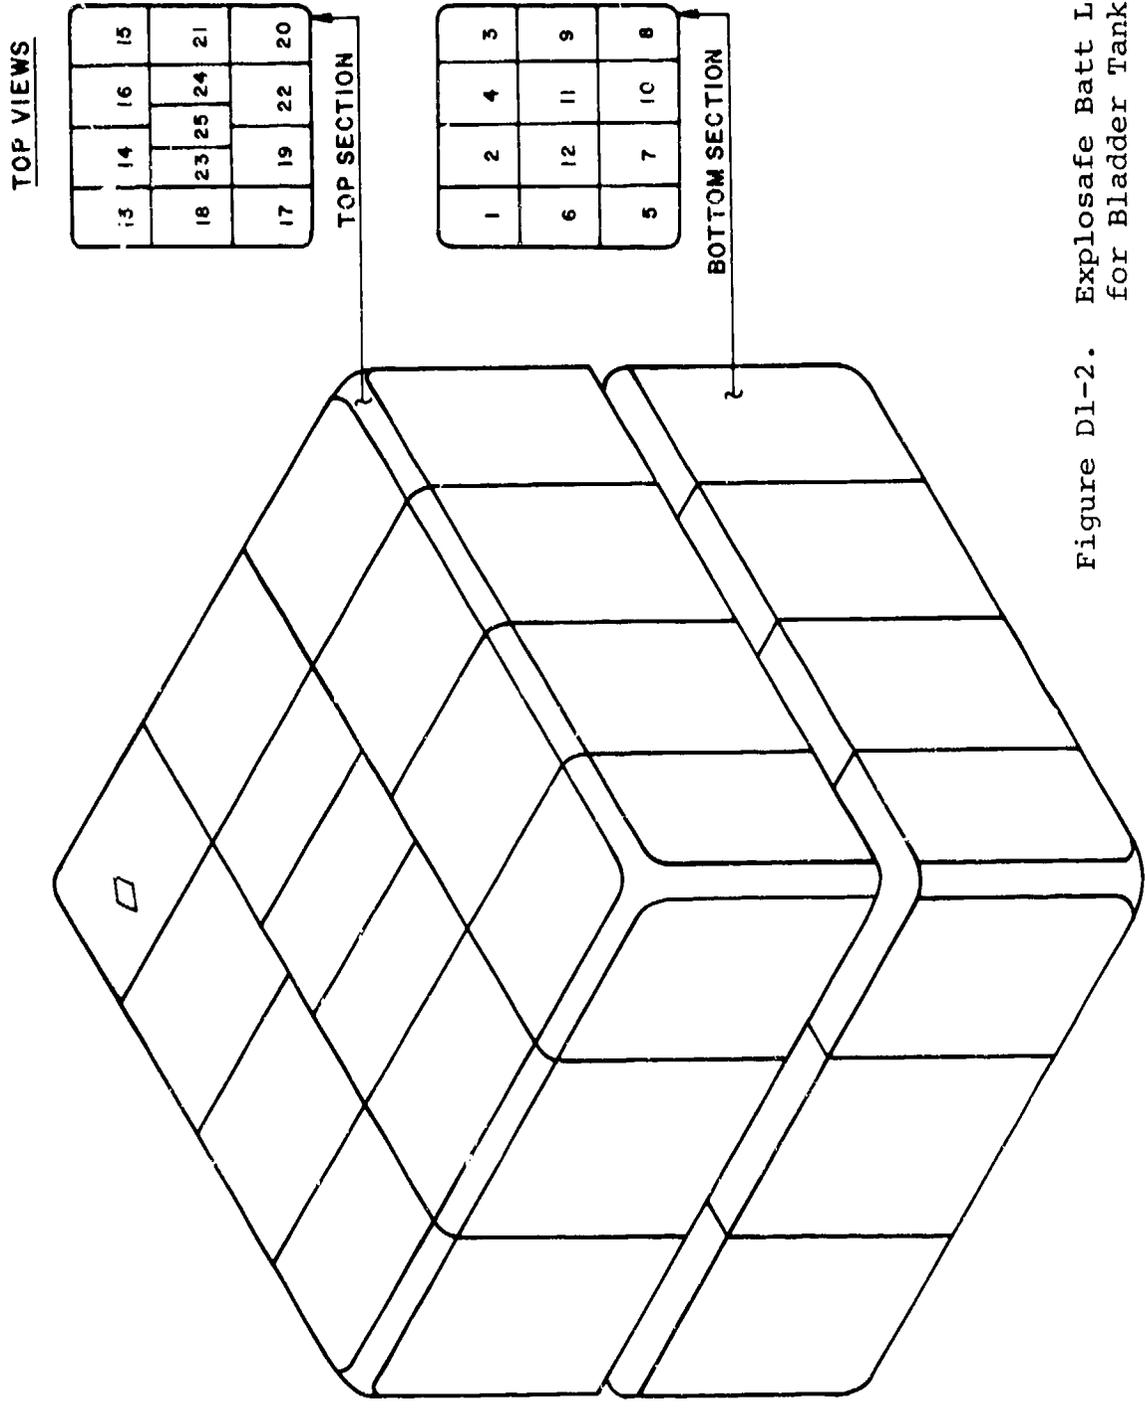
Explosafe Batt Layout for Bladder Tank
